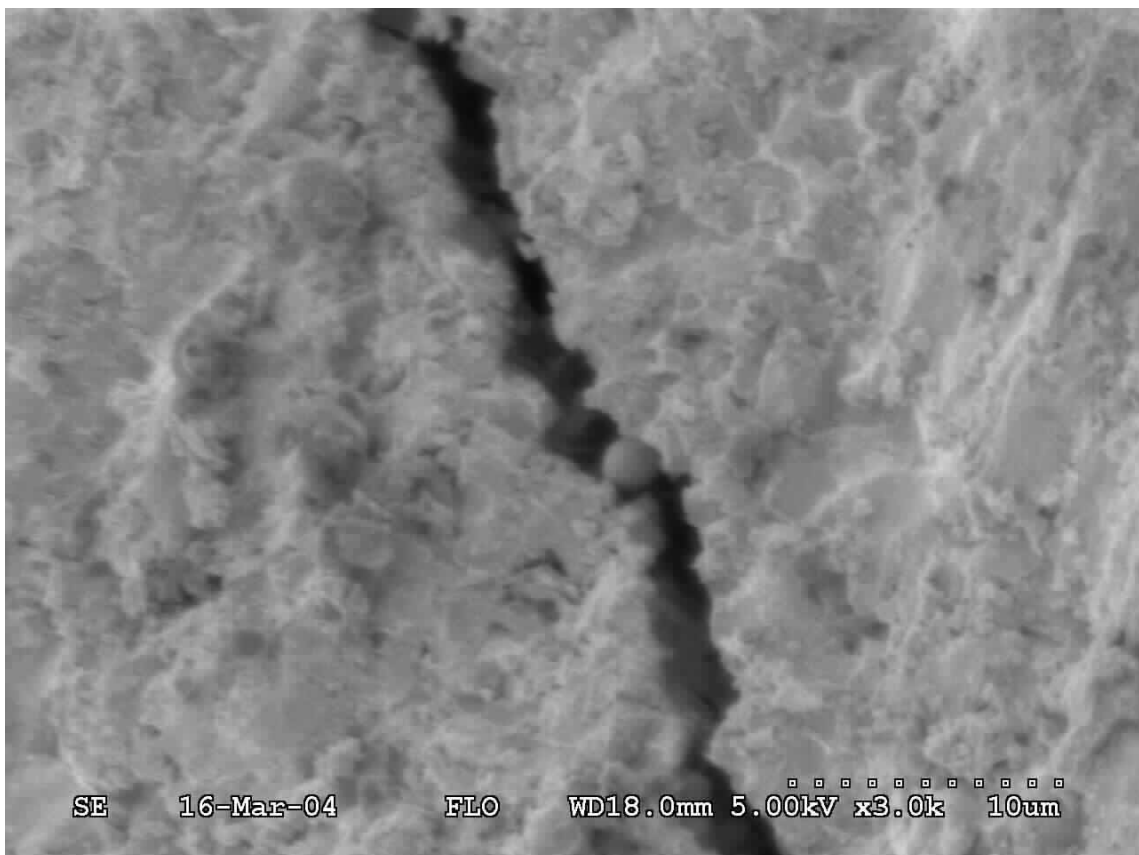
Fracture surface with crack. (LOT ...-00)
